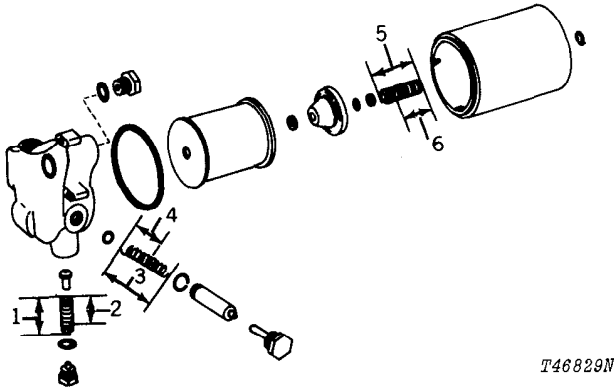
Hydraulic Oil Filter and Relief Valve Springs
